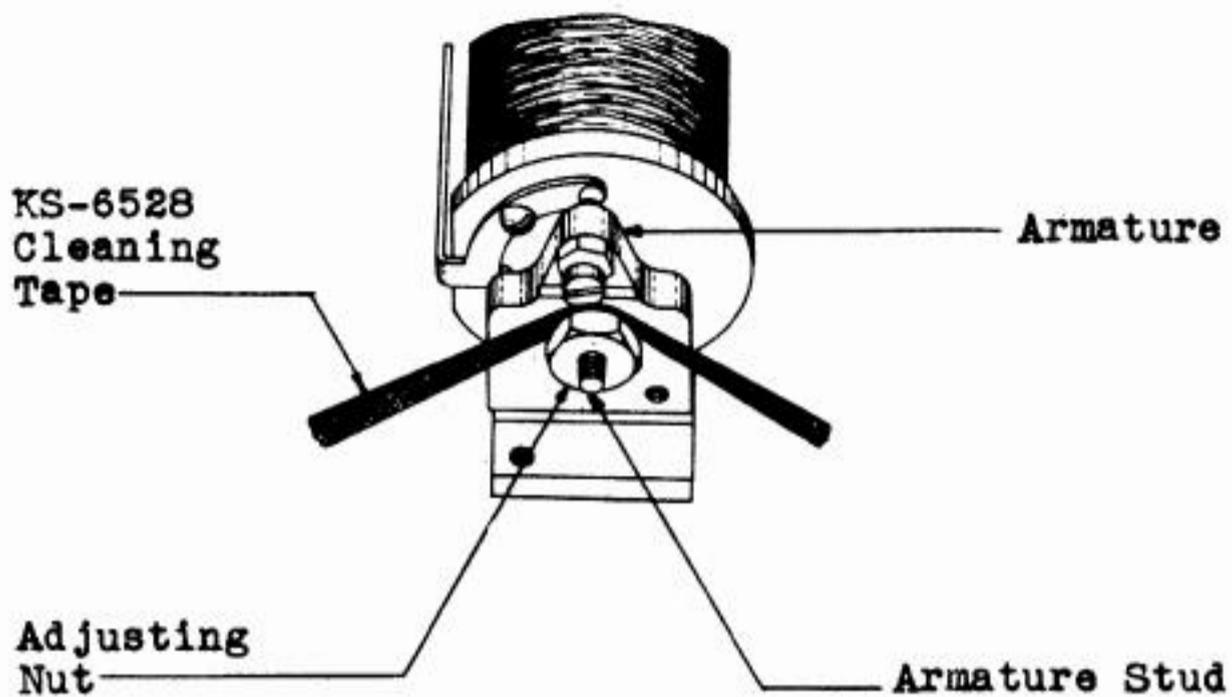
Method of Cleaning Adjusting Stud and Adjusting Nut on 89, 101, 105, 108 and 172 Type Relays
